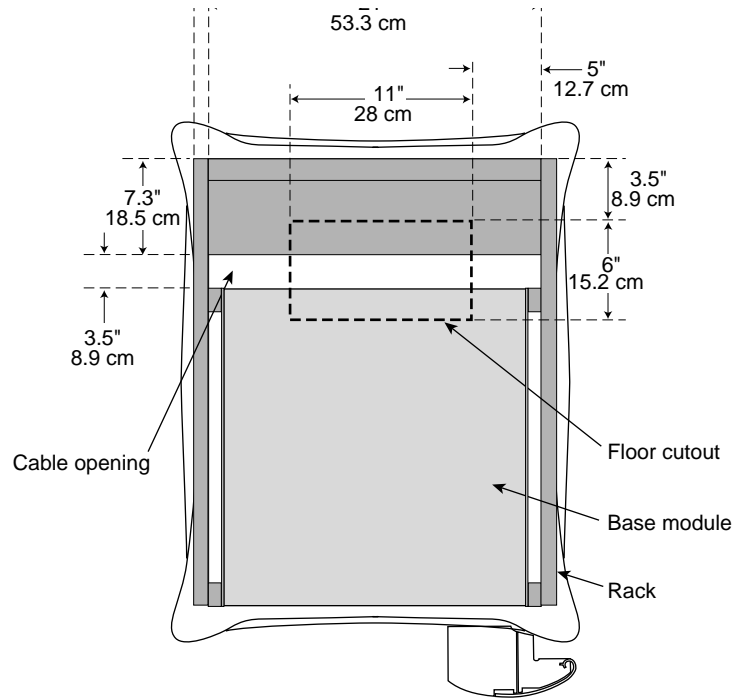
Origin2000/Onyx2 Rack Chassis Cable Opening
